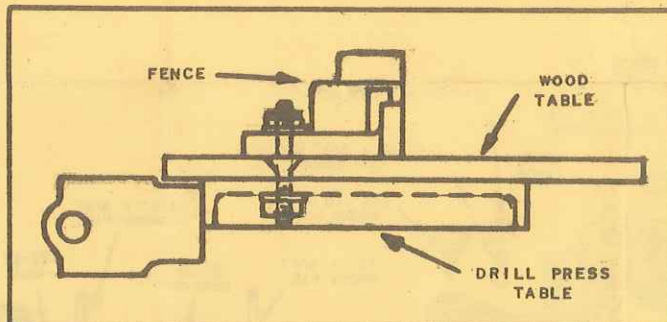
Method of Mounting Shaping Table and Fence to Drill Press Table.
